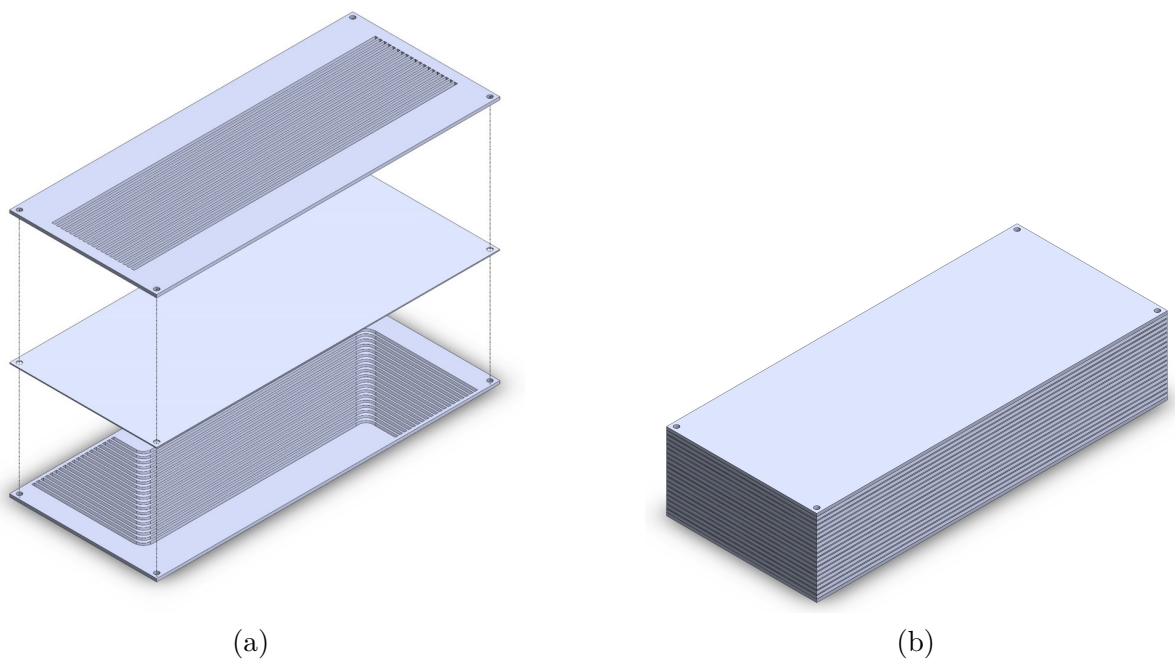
(a) Heat exchanger core after machining and (b) heat exchanger ready to be used.
